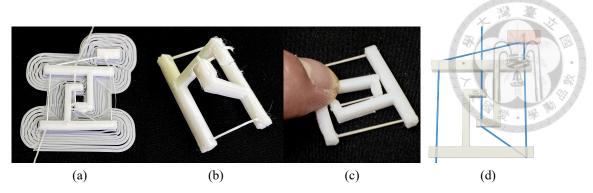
(a) A pop-up mechanism printed flat while the thread is in tension. (b) The mechanism contracts and stands on its own after removing the brim. (c) The structure works like the scissor mechanism in keyboards. (d) The design of the fiber path; note the off-object anchor (pink).
